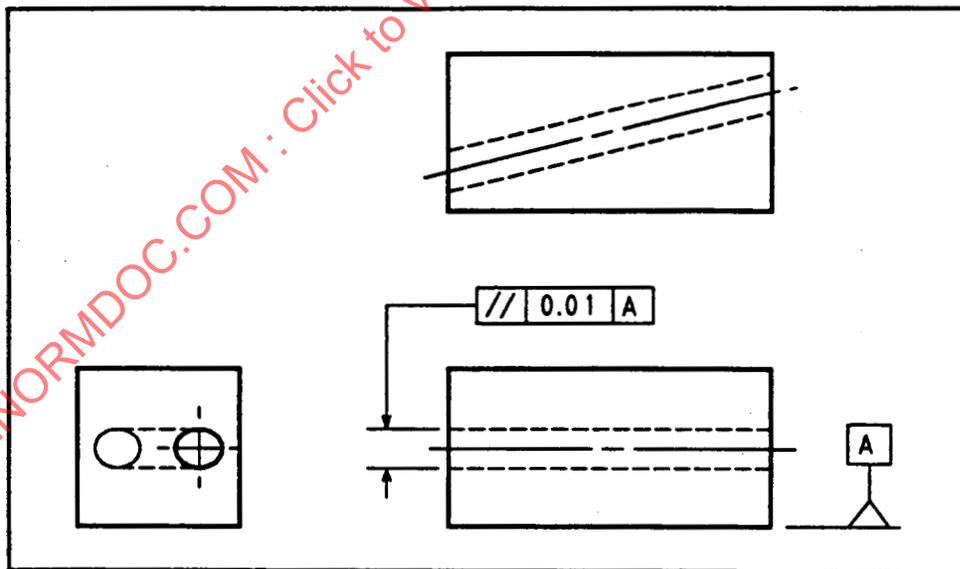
PLANAR PARALLELISM OF AN AXIS; PRIMARY DATUM PLANE; NO SECONDARY DATUM SPECIFIED
